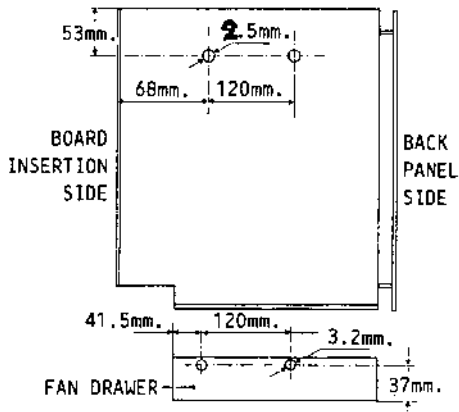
Drilling holes in the M60 casing for the LA17
